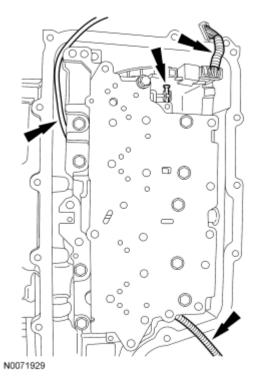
Locating TSS, OSS & TR Sensor Wiring Harnesses Courtesy of FORD MOTOR CO.
